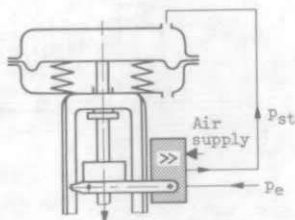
"Spring opening" actuator attached to the right, operating direction >>
